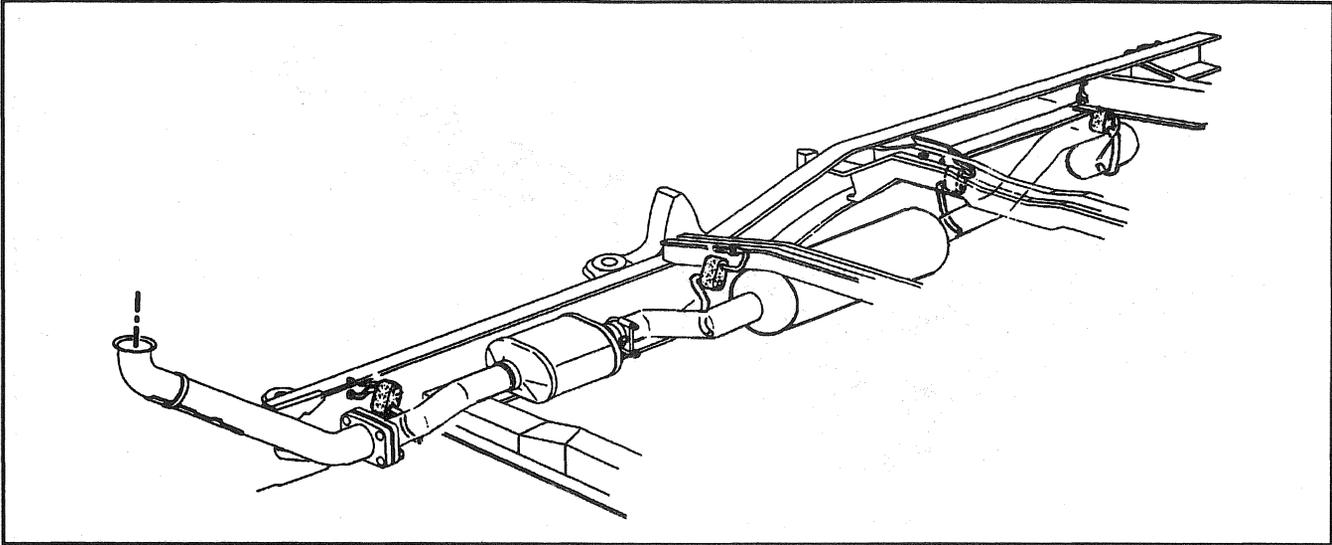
Exhaust System - C/K 1 and 2 Regular Cab Long Box w/6.5L Diesel Engine
